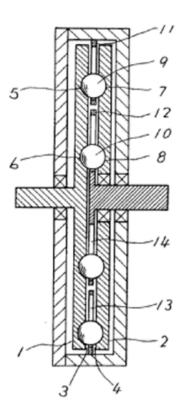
illustrates a cam gearing comprising a rotary input and rotary output. Balls (9) and (10) engage opposite cam discs (1) and (2).
